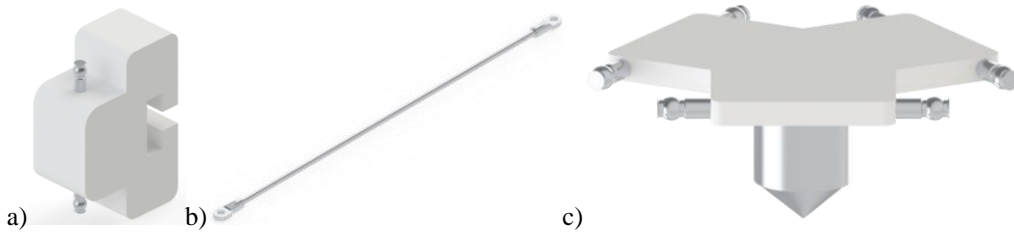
Parallel manipulator components. A) Prismatic joint. B) Link L . C) Moving platform.
